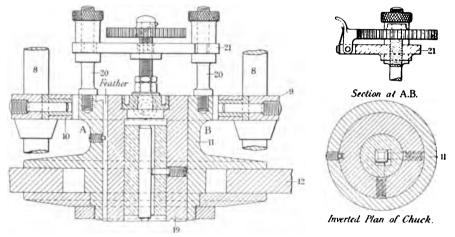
The Benton-Waldo machine; detail of sliding head and chuck. Half size.
